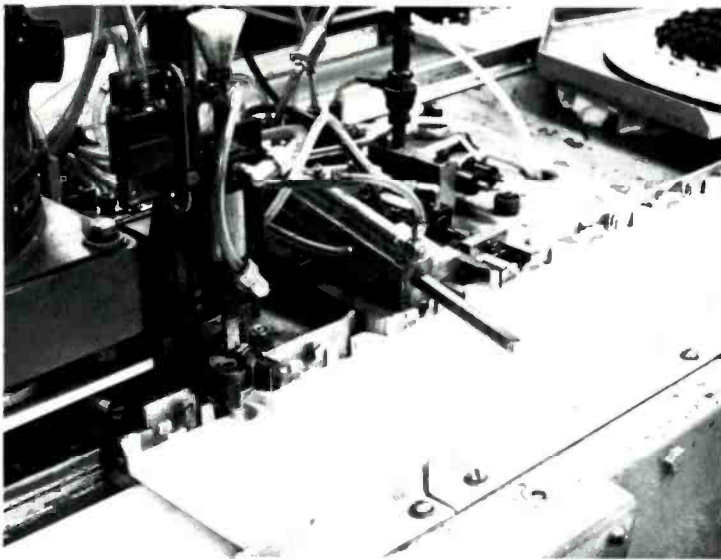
Post lubricator and pressure roller inserter—bar at right deposits lubricant; cylinder at left is about to insert roller.
